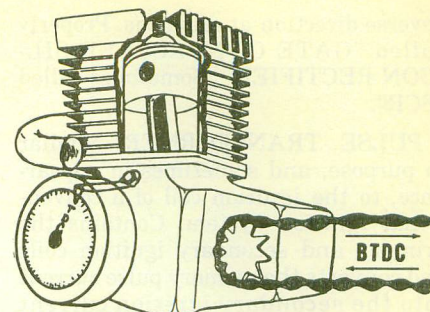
View of typical degree wheel installation for checking ignition timing. Degree wheel can also be used for checking rotary valve timing and piston port opening.
